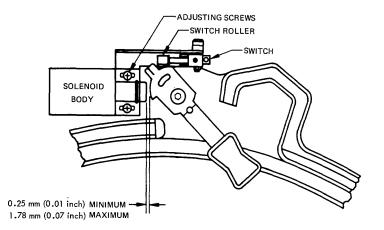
Adapter Casting and Lock-Arm Clearance
